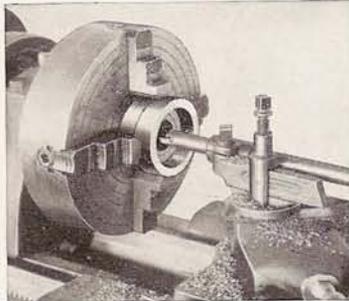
Boring a Steel Collar Held in a 4-Jaw Chuck.
